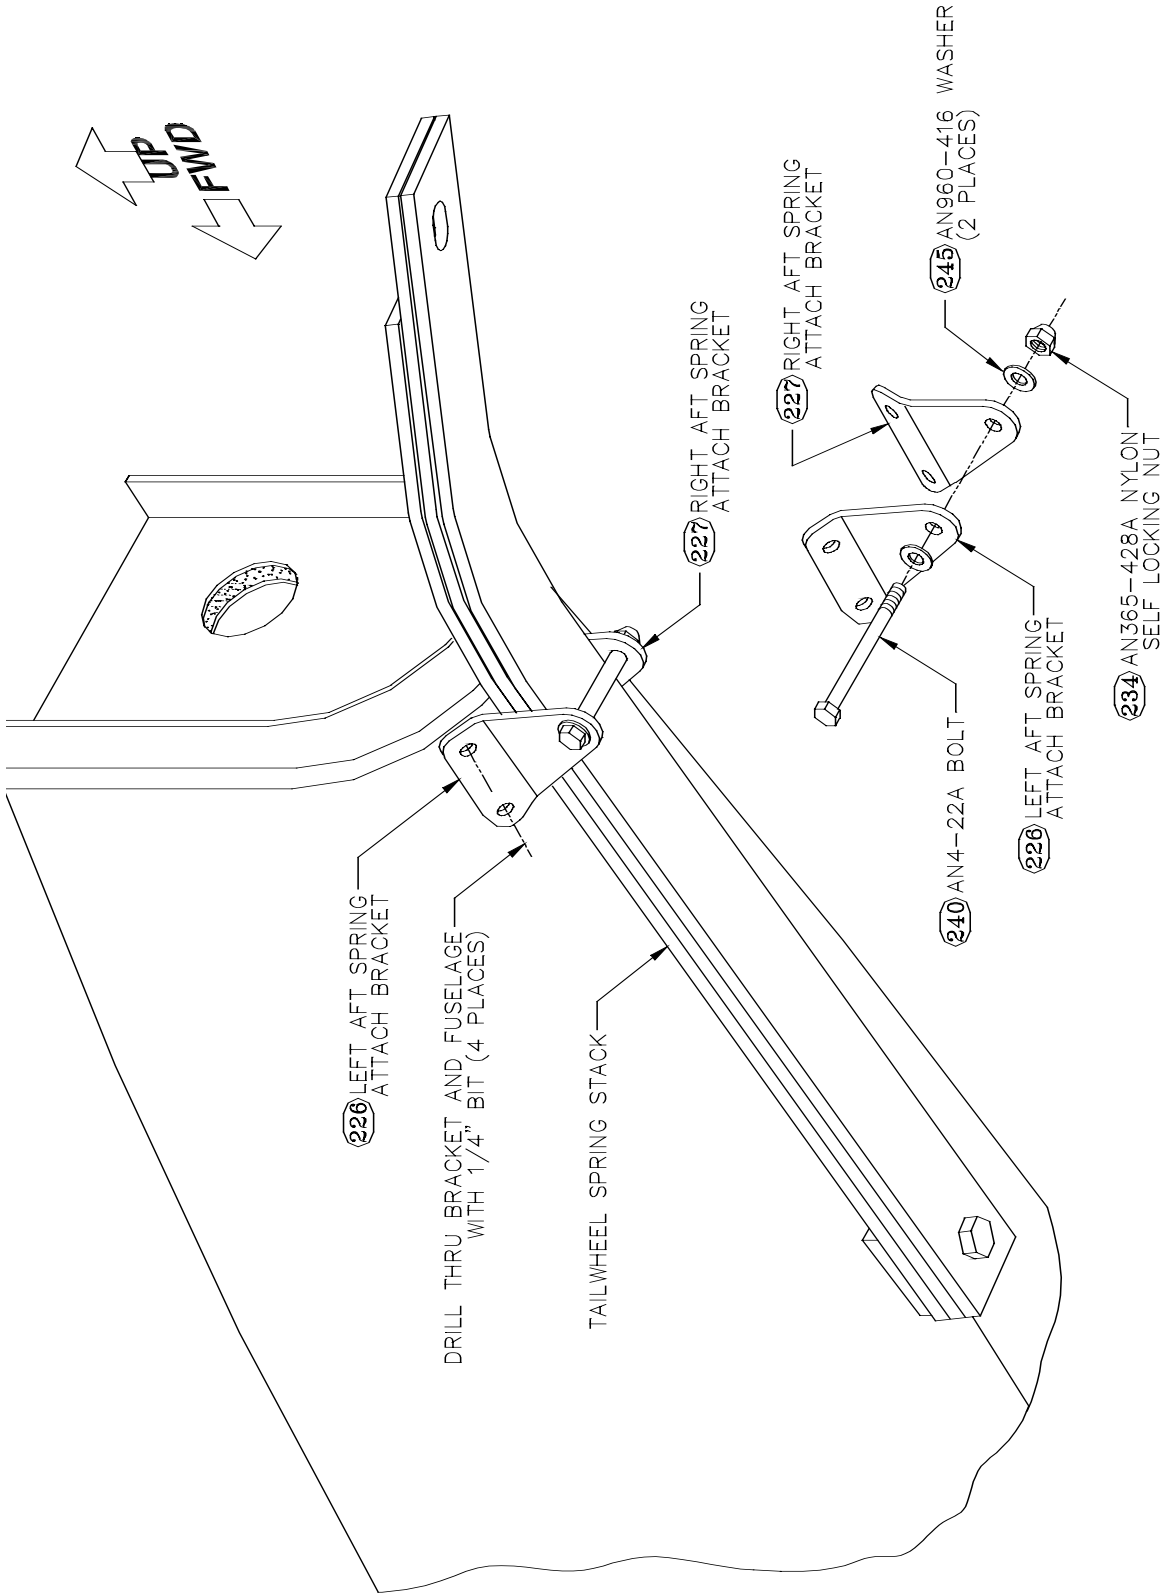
Positioning and Drilling the Aft Spring Attach Brackets
